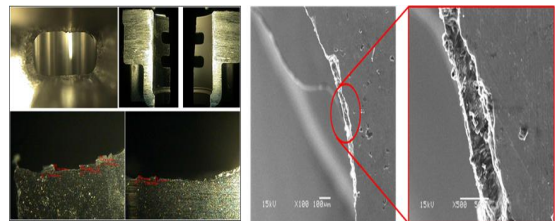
Burr formation at valve body and the formation of fractured chamfer
